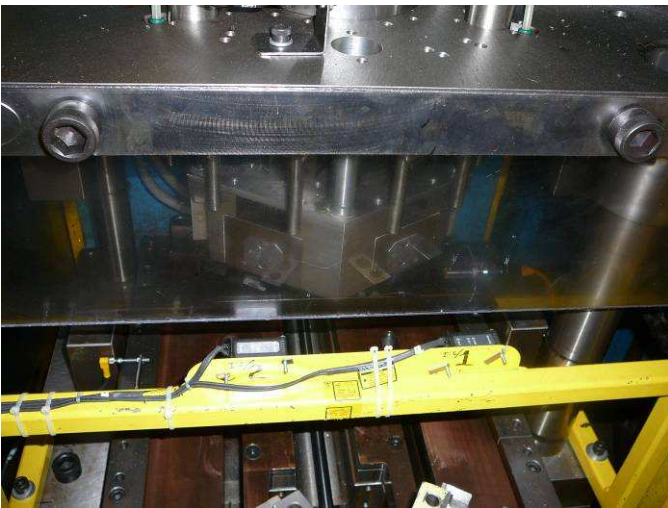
Torsional Damper Assembly - Spring Stuffer (W-054/P-060).
